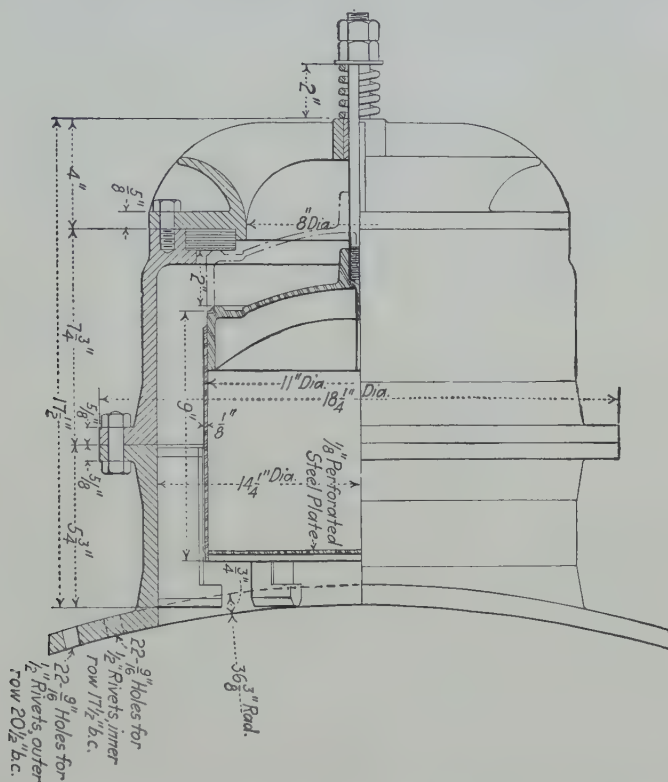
Eight-inch air inlet valve for 6-ft. steel pipe line—Coffin Valve Company, Boston.
